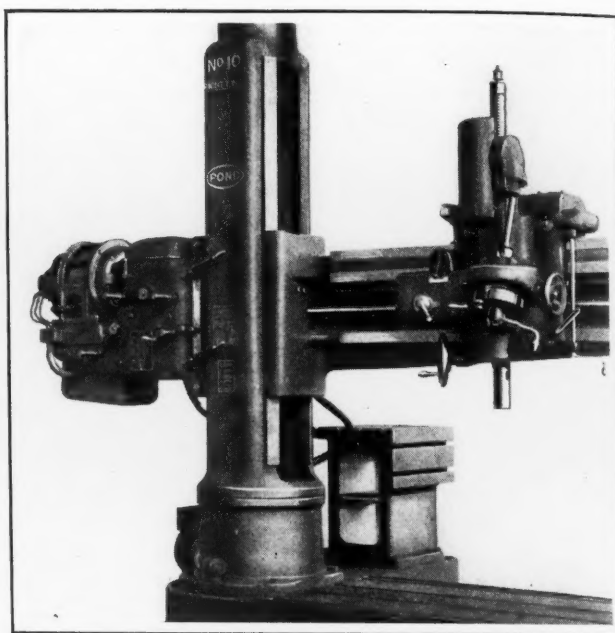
Radial Drilling Machine Arranged for Alternating-current Drive
